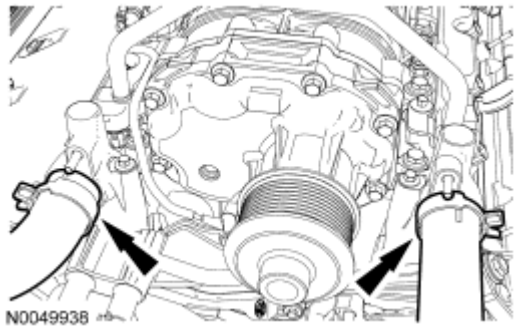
Locating Upper Radiator Hoses From Intake Manifold
